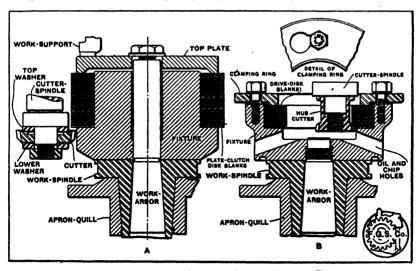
Methods of Holding Plate Clutch Discs on Fellows Machine
